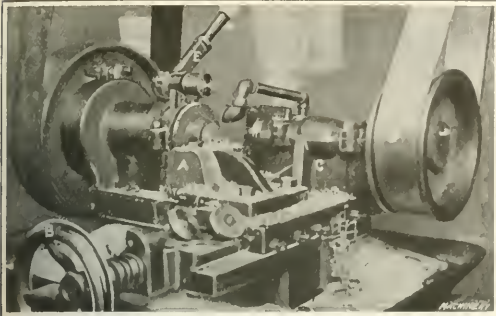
Machining Gas Plugs on Holden-Morgan Special Plug Machine
